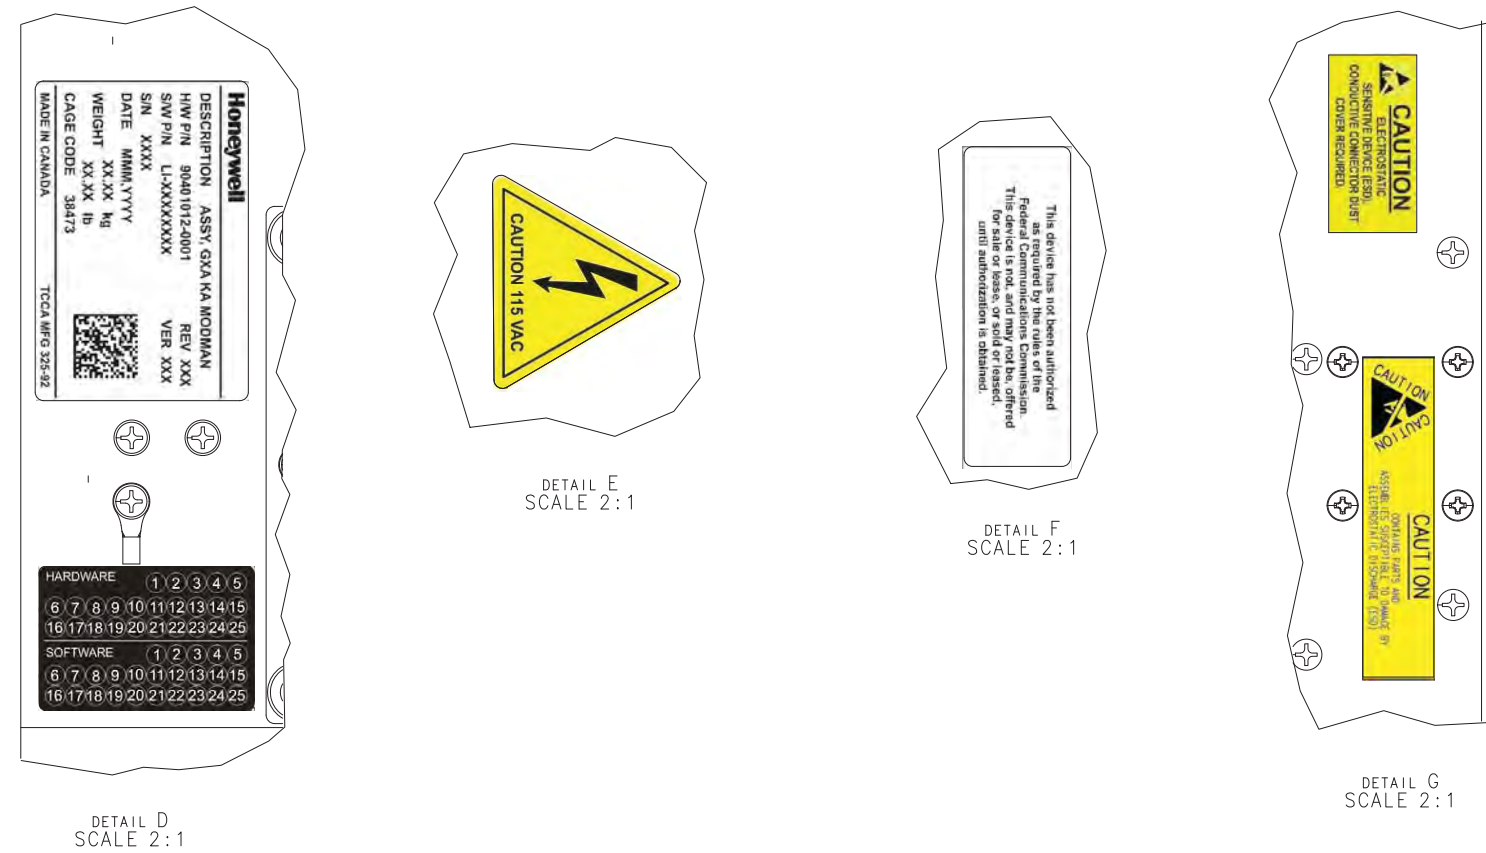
Modman Outline and Installation Drawing (Sheet 3 of 4)
